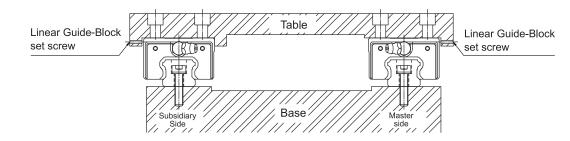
Mounting the Linear Guide without Set Screws on the Master Linear Guide Rail
